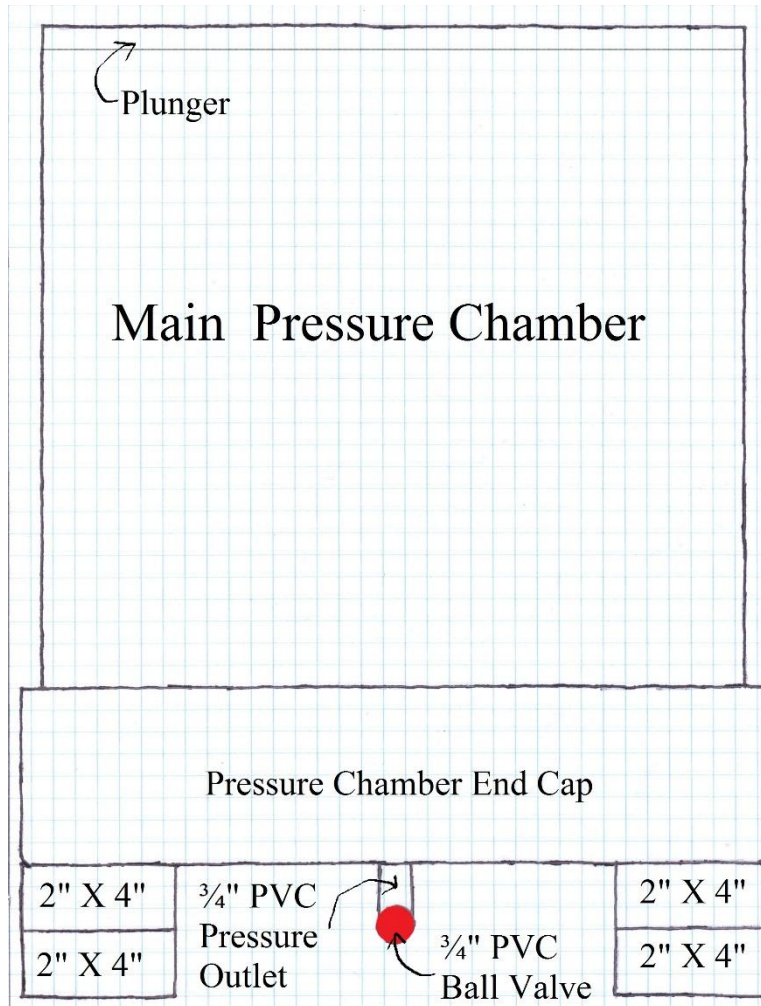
The rigid weighted bladder's front view drawn on a 1 unit to 1/2 inch scale. The red circle indicates that a part is coming out of the drawing. (Photo by Casey Tucker)
